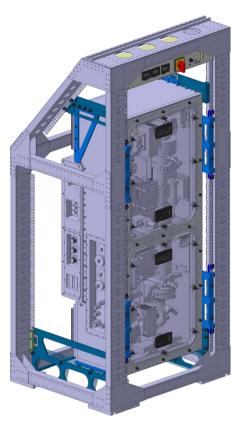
Technical drawing of AMICA mounted in a HALO rack. Special mounting adapters are shown in blue colour.
